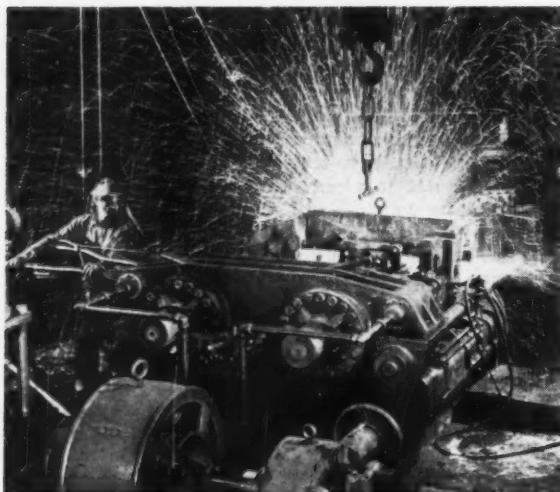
Large flash welder having a capacity of 36 sq in. of joint in a single weld
